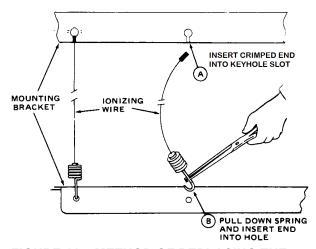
METHOD OF REPLACING THE IONIZING WIRE
